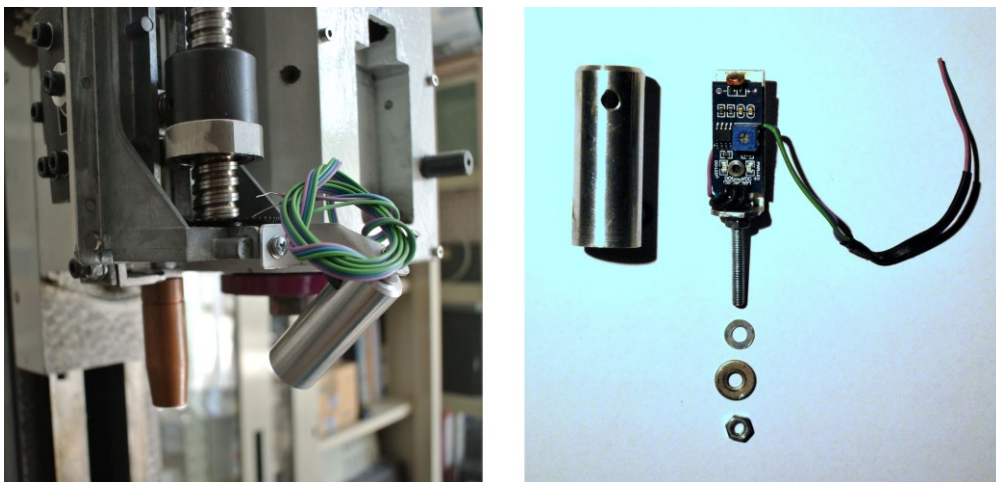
The photoresistor assembly mounted on the machine (left) and the photoresistor circuit and its housing (right)
